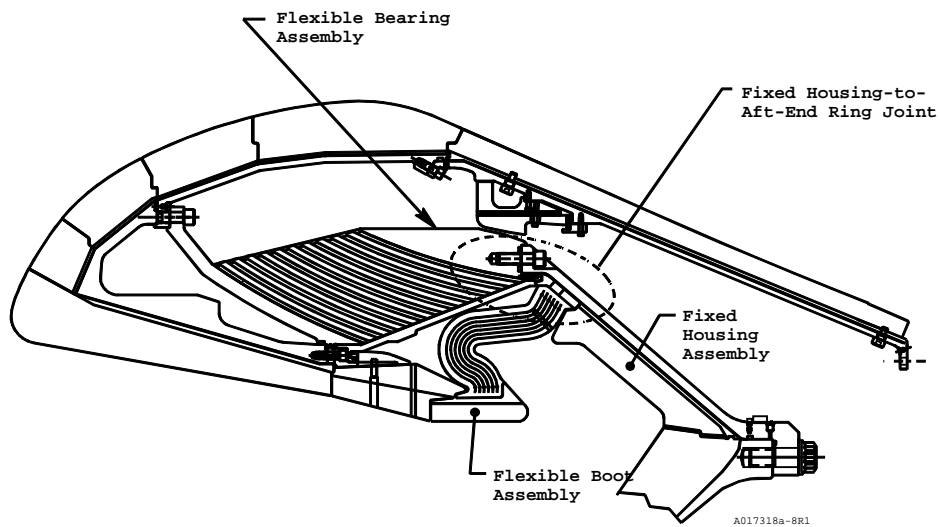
Fixed Housing-to-Aft End Ring Joint Location
